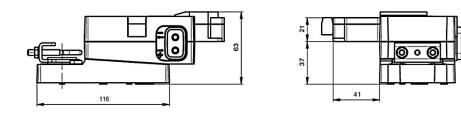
Dimensions: GYY-LMV-BAC-001 (mm)
